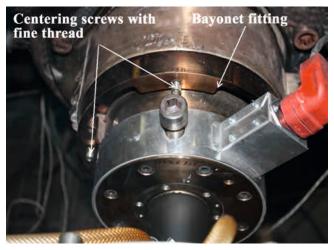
In operation: Tilting die equipped with fine-thread screws for delicate centering
